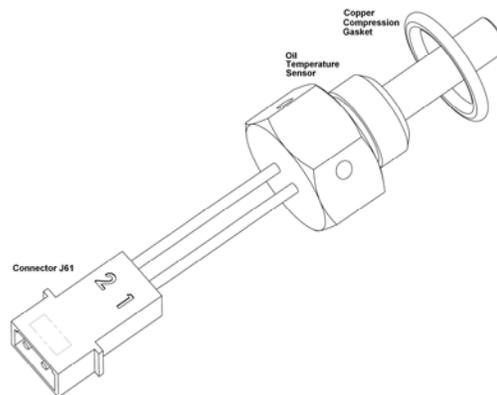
Oil Temperature Sensor Showing the Copper Compression Gasket
